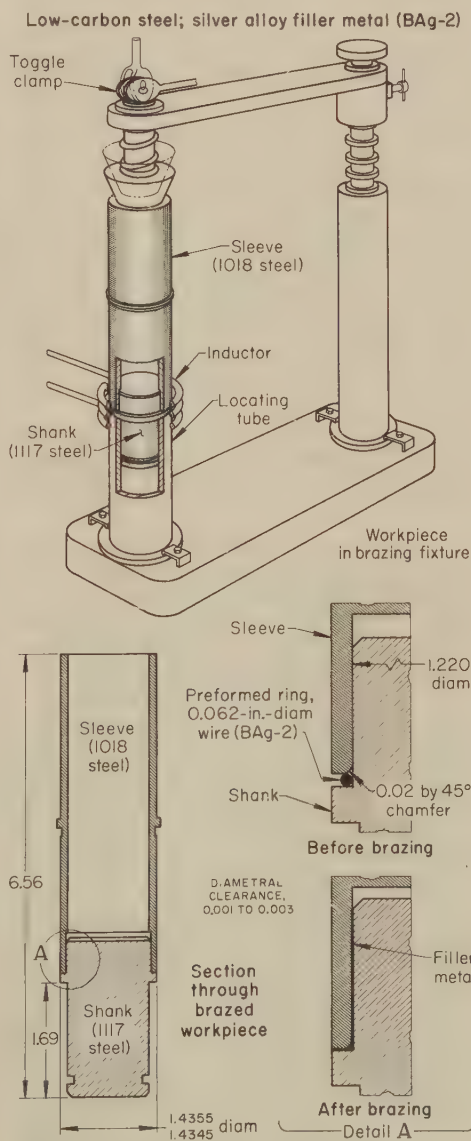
Induction brazed drive spindle positioned in the inductor by a fixture that finished assembling the components by forcing them together during brazing (Example 587)
